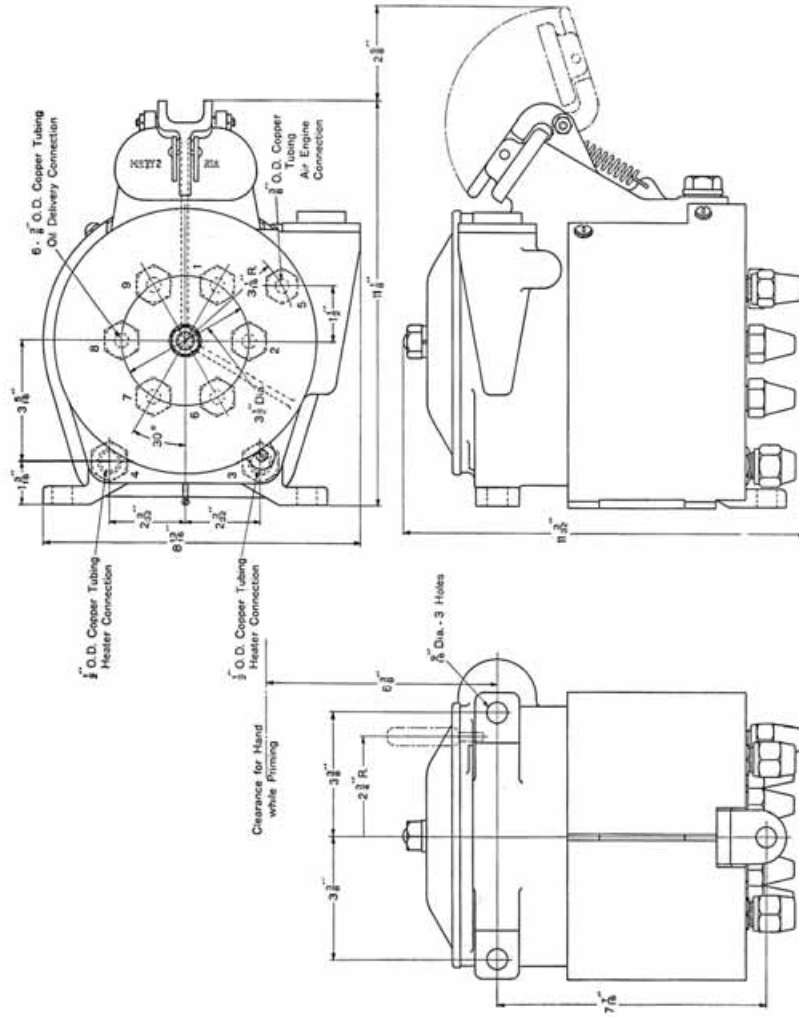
Outline Drawing of the Type "F-1-A" Lubricator
